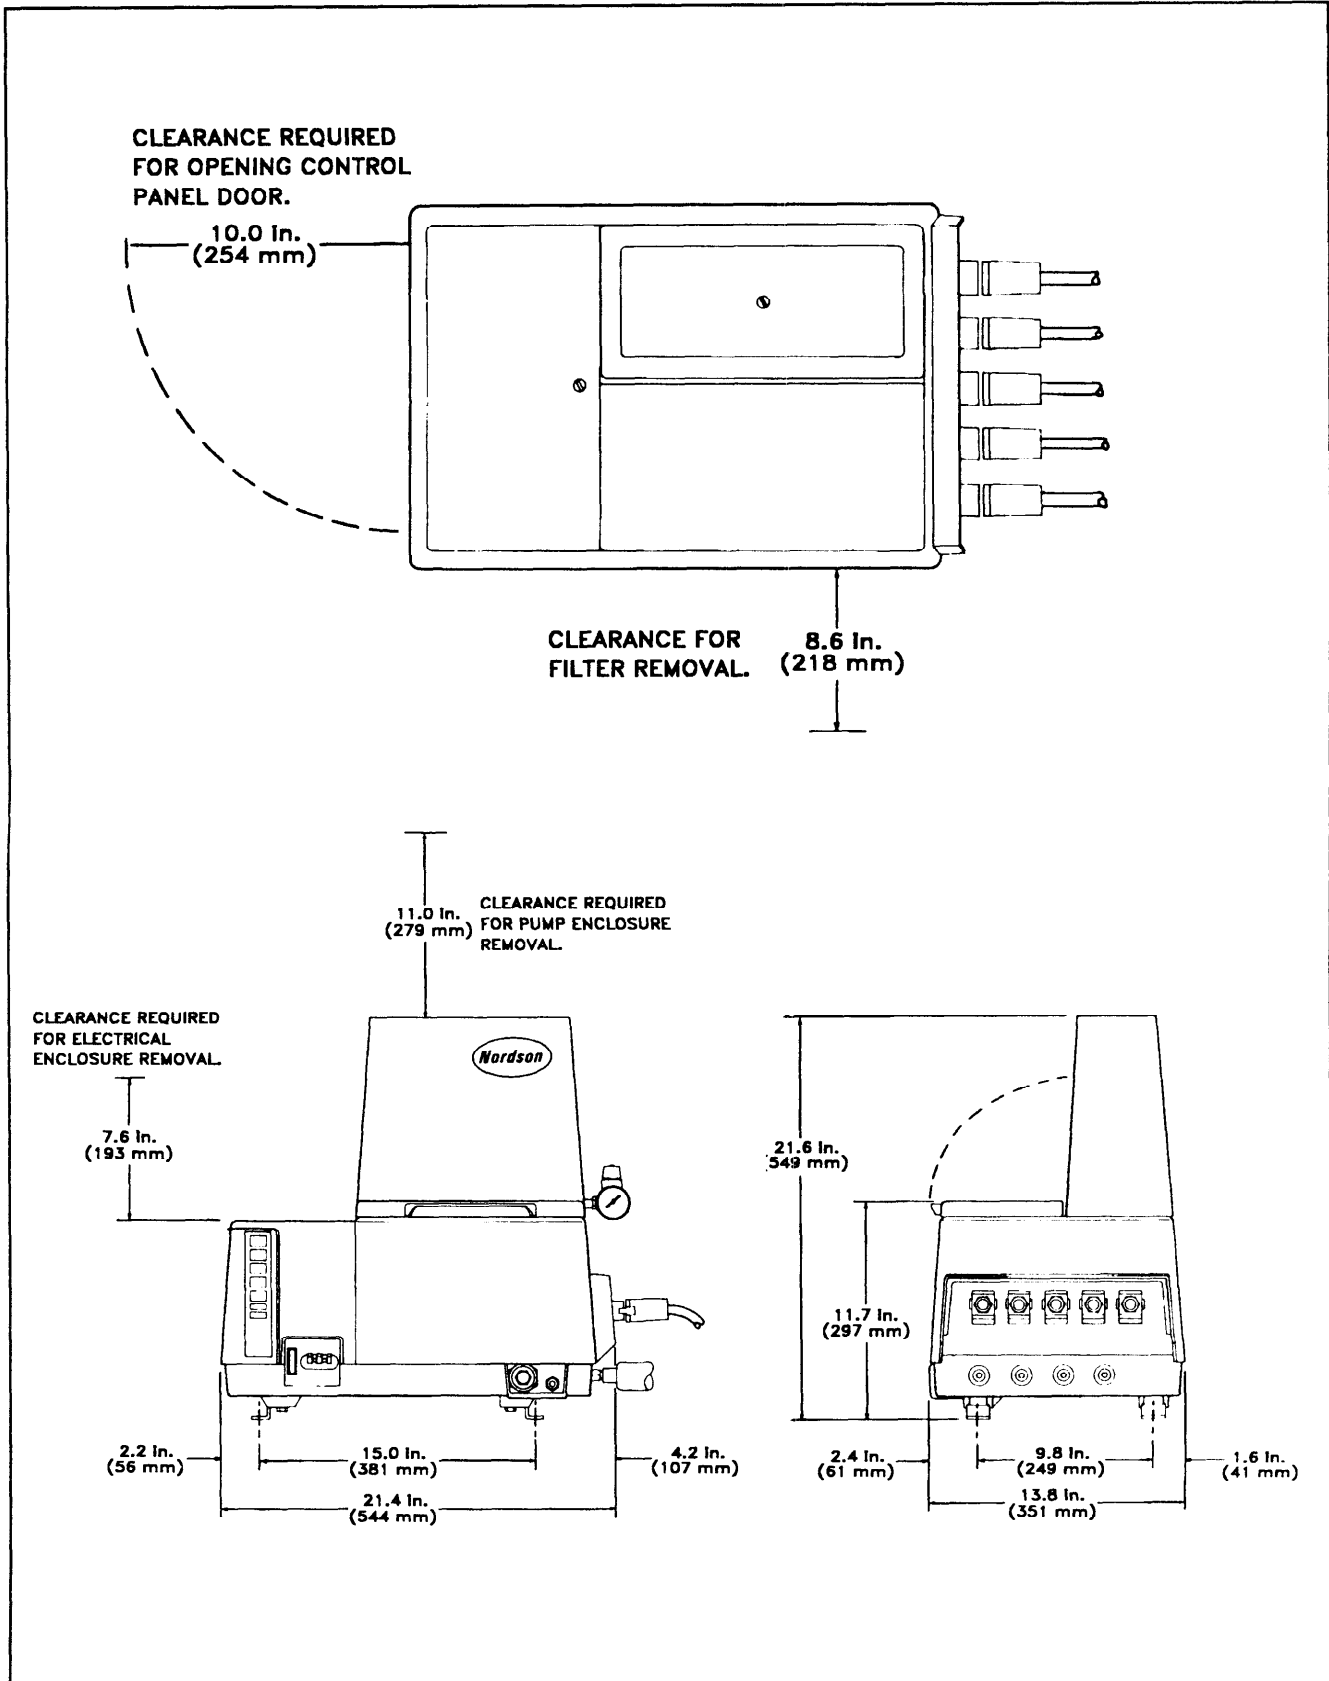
Series 2300 Dimensions in Inches (Millimeters).
